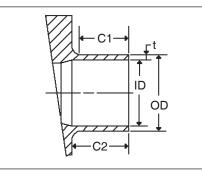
Opt-24 Butt Weld End Connection
